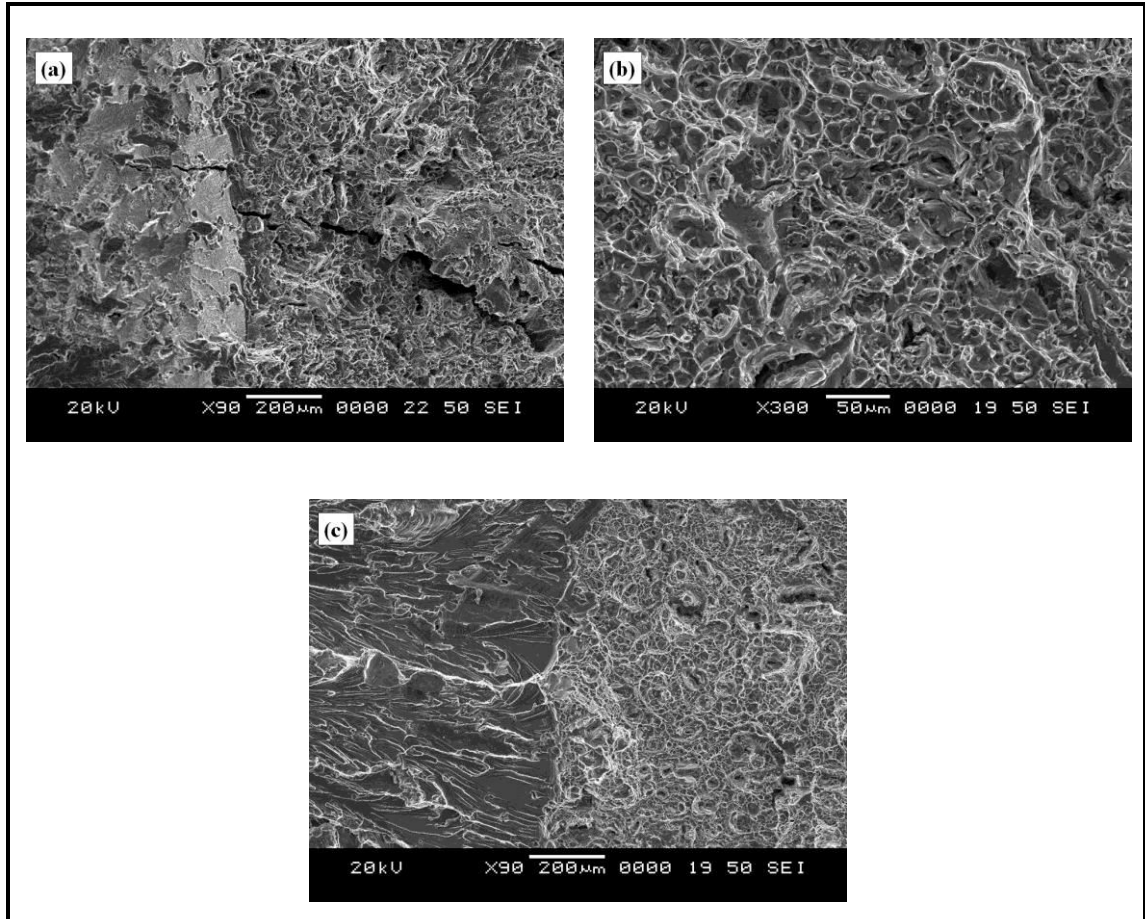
Fractography of CT samples tested for fracture toughness test; a) T6, b) RRA, c) T7451
